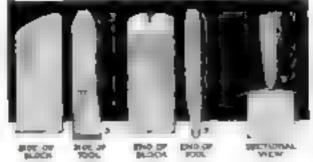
, Pinis block need for making bowls, and shaped block and tool for decorating them.
